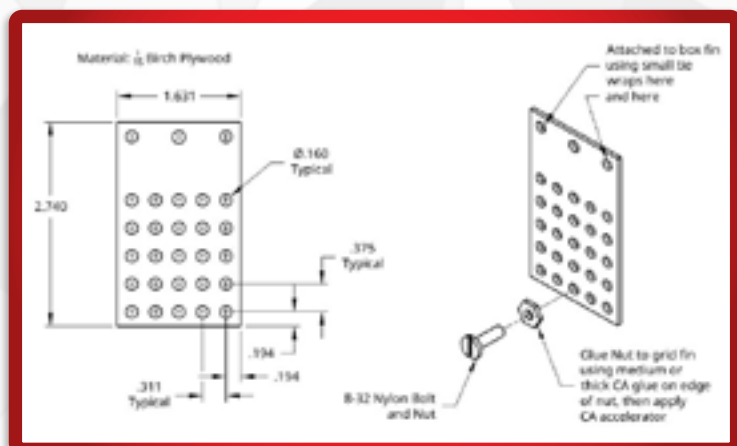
GRID FIN DRAWING AND ASSEMBLY. ADJUSTMENT IS ACCOMPLISHED USING 8-32 NYLON BOLTS AND NUTS.
